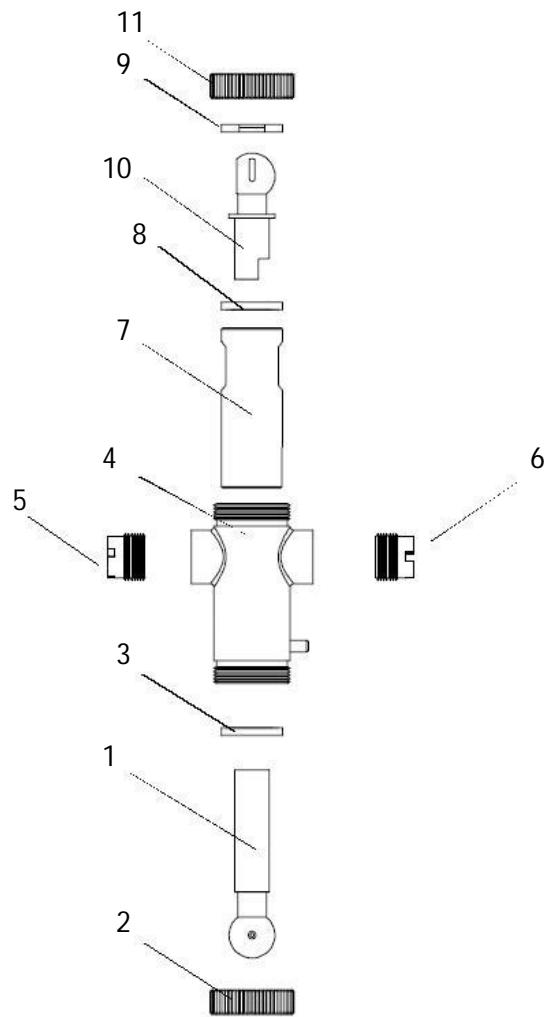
Lip/Face Seal LF Multiplex Pump Module Components Assembly/Disassembly
